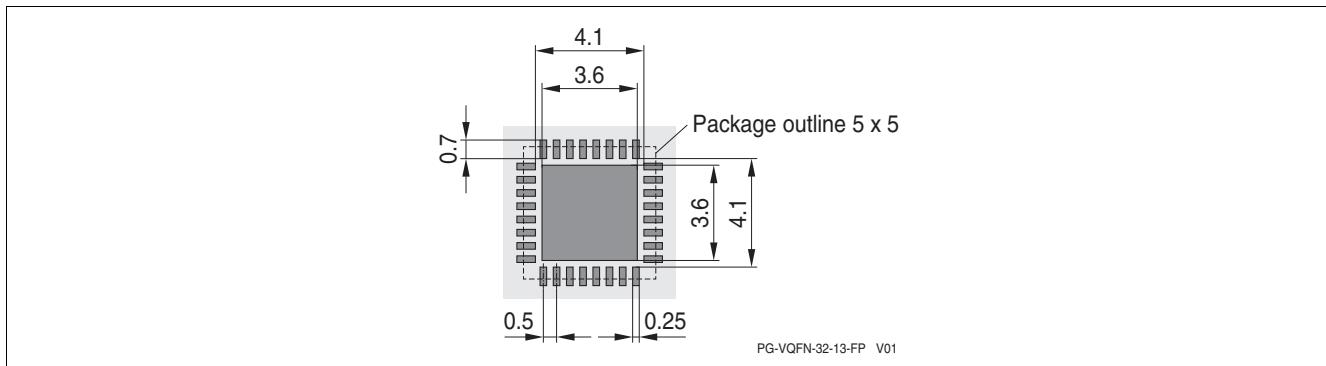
Recommended Footprint PG-VQFN-32-13
